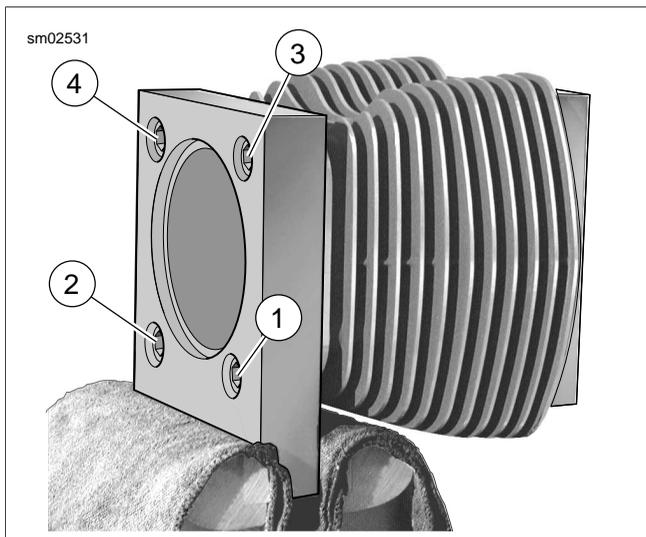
Cylinder Torque Plate Bolt Sequence
